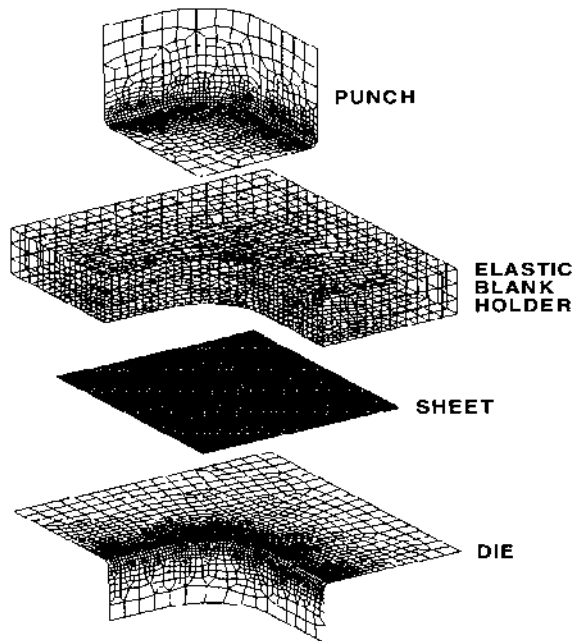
FEM model of the rectangular tool with elastic blank holder.
